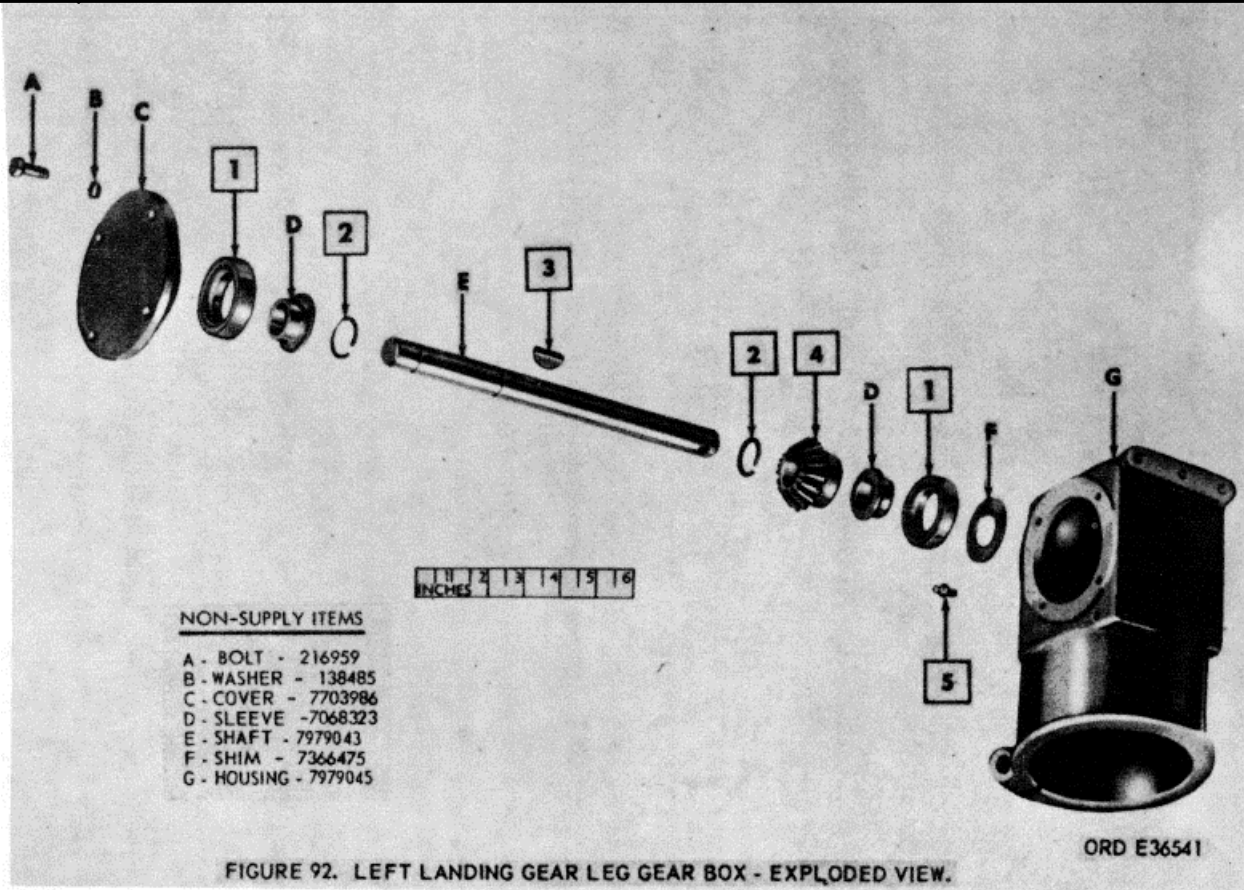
LEFT LANDING GEAR LEG GEAR BOX - EXPLODED VIEW.
